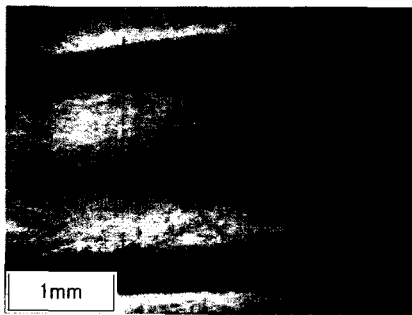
Weld cross section for Experiment 3-1(P)
